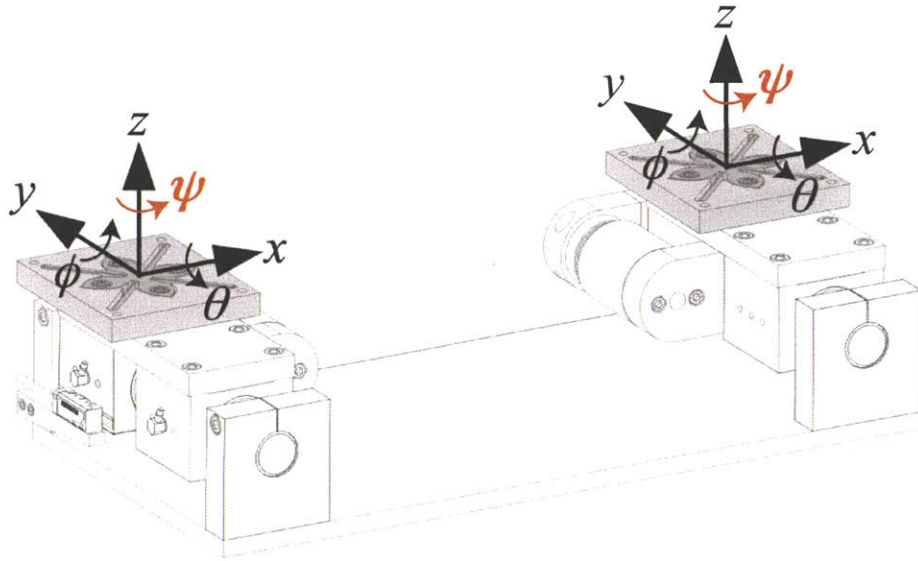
Print head construction: Rotational flexures were mounted on each linear stage to allow for the small degree of rotational movement that is necessary for the print head to be able to compensate for any misalignment in the system or taper in the stamp. Flexural bearings were chosen for this purpose because they are frictionless, though they do introduce a non-linear rotational stiffness.
